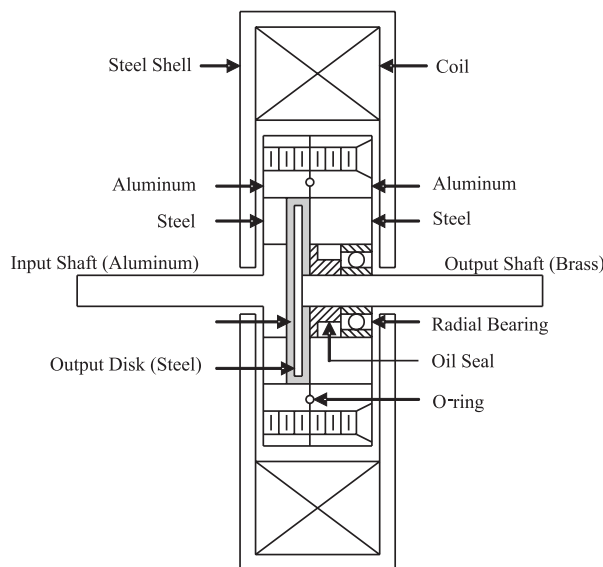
Clutch assembly and electromagnetic coil arrangement.
